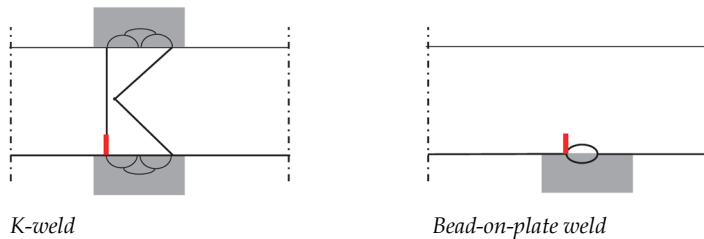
Welded specimens with ground edge and crack position in red
